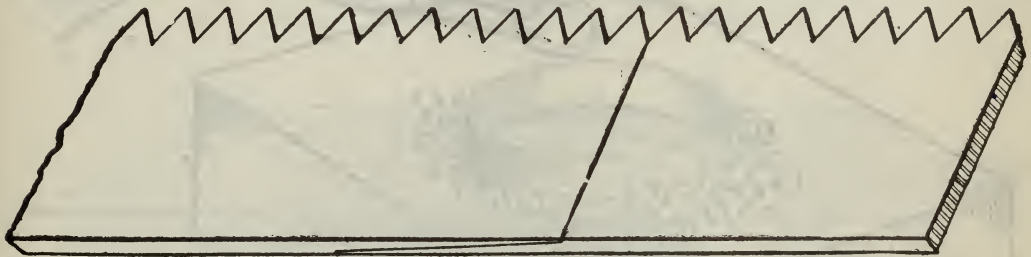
,466.—Lap brazing. A band saw is a good example of this method. In making the lap the two ends are chamfered by filing to make an accurate joint as shown. Silver solder is generally used, it being applied between the two surfaces, or the surfaces are coated with borax and the solder allowed to flow into the joint from the edges. After firmly clamping the parts in position, the solder is laid over the joint, or it may be placed between the two pieces to be united. When the heat is applied, the solder melts and the two pieces must be squeezed tightly together to force out surplus solder. Silver coins contain 10 per cent. of copper and make a good hard solder. When using a coin, pound it until very thin and then place between the two surfaces to be brazed.
